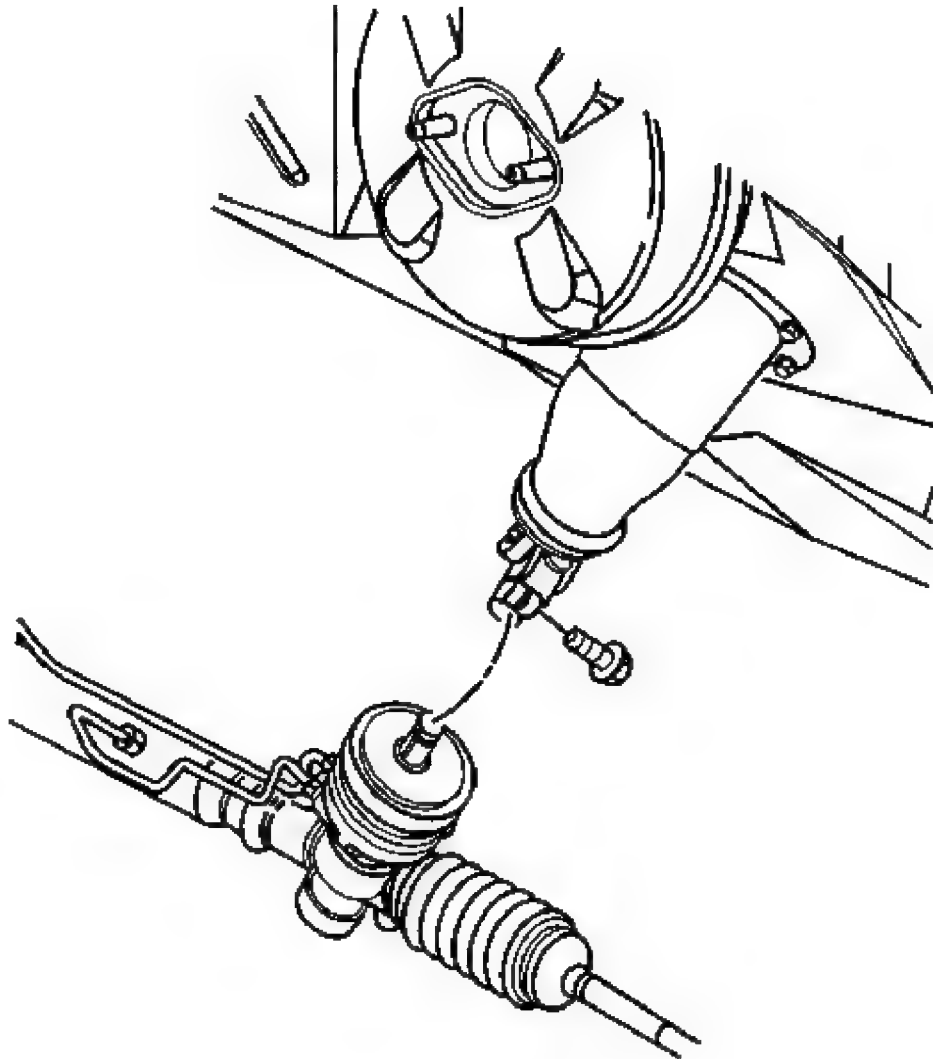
Locating Steering Rack-To-Intermediate Shaft Pinch Bolt
